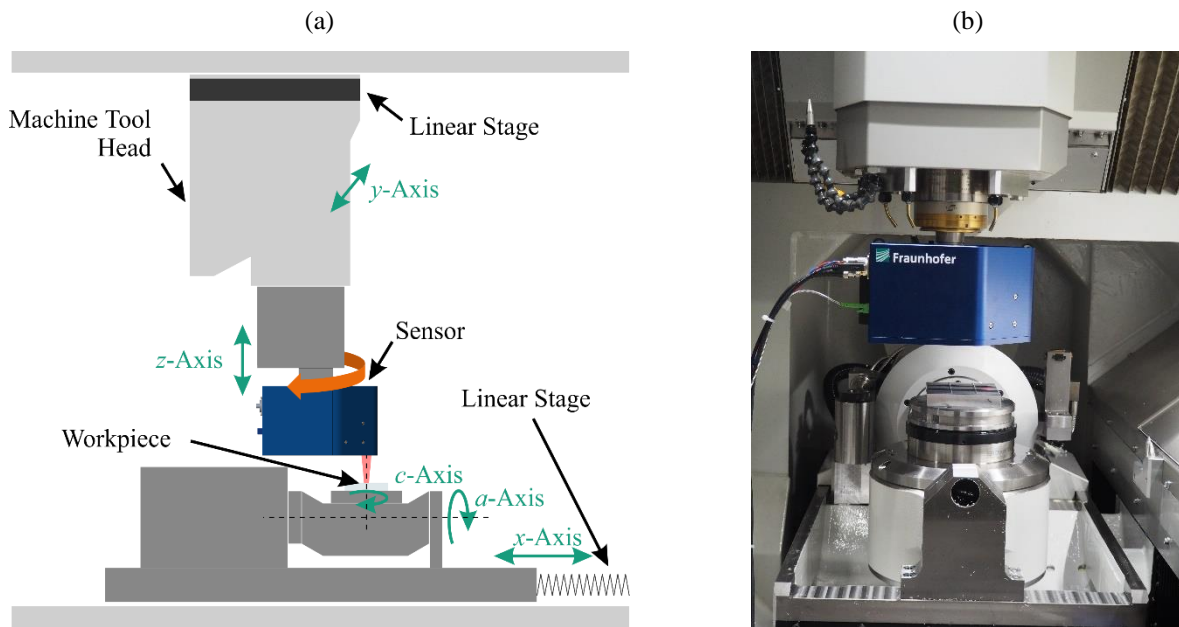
(a) schematic integration of HoloCut measuring a work-piece inside a standard 5-axis machine tool. The motion axis of the machine tool head closed-loop control is indicated in orange, (b) Photograph of HoloCut inside 5-axis milling machine.
